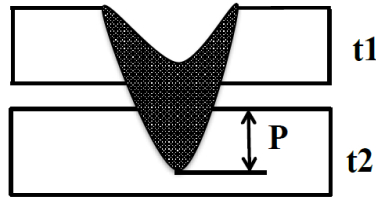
Penetration (Remote Laser Welding)
